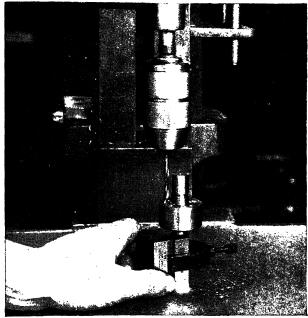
Planning for machining. In order for the drilling to be done as shown, it was necessary that the cylindrical part be trued up first to fit into the V-block fixture. This is a good illustration of the planning that must be done for complicated machine parts in order to supply true bedding points for accurate machining. (Brown and Sharpe.)
